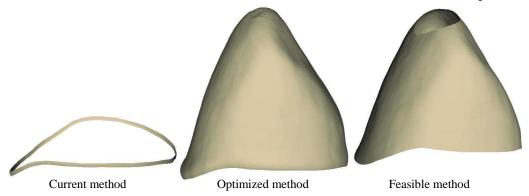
One example of the three surfaces used for calculations. From left to right: Current method, finding the best possible assembly along the finish line. Optimized method, using the whole surface for allocating support points. Feasible method using a part of the surface for allocating the support points, an area along the finish line as well as the top area is excluded for support point allocation
